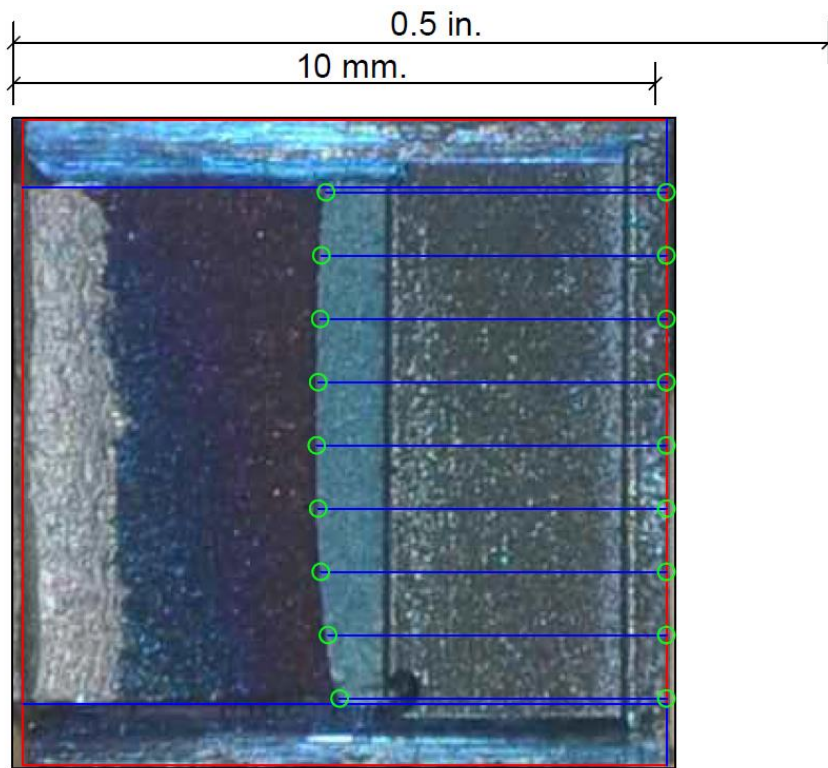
Specimen E7' Fracture Surface
